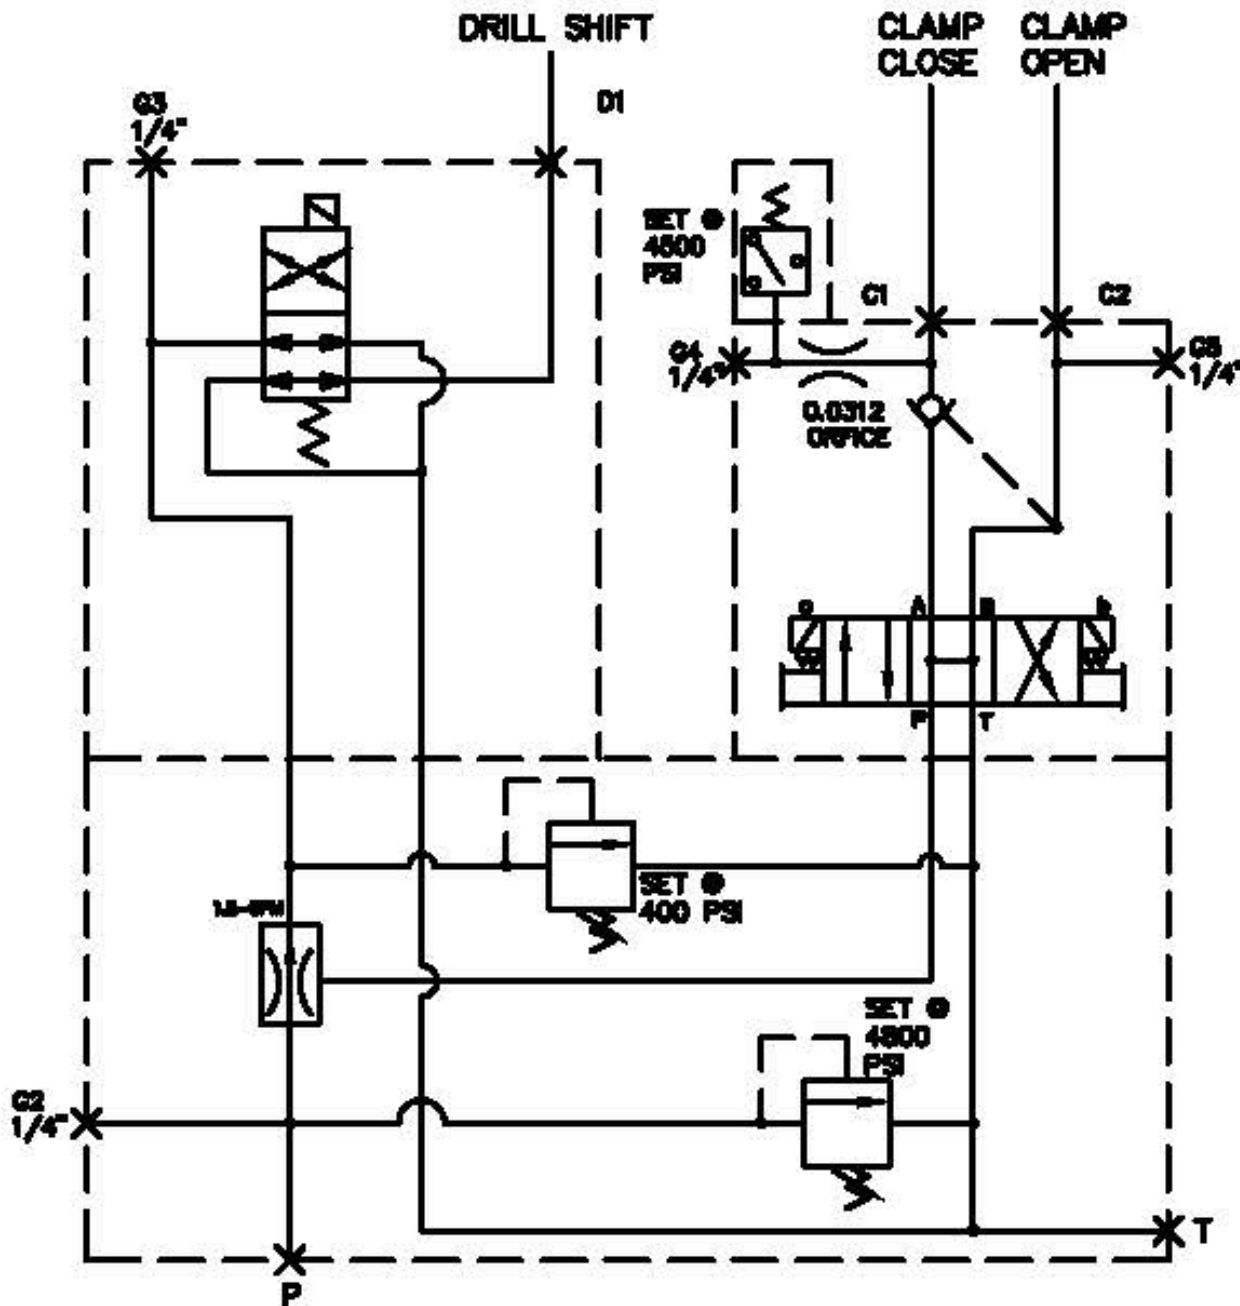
C. Hydraulic Schematic - Clamp Drill Manifold
